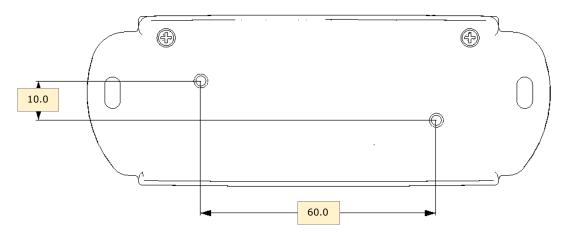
LDSBUS Thermocouple Sensor Adapter Dimension – Bottom View
